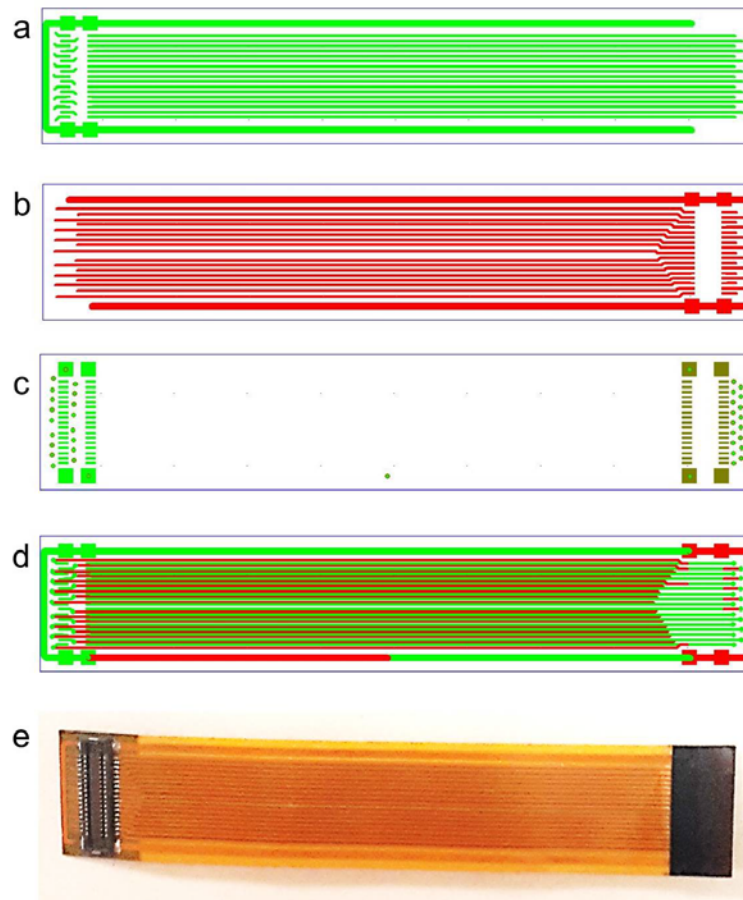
The design and fabrication of the FFC. (a) The first circuit layer. (b) The second circuit layer. (c) The metal pad layer and through-hole layer. (d) All the layers merged together. (e) The fabricated FFC with two plug connectors soldered.
